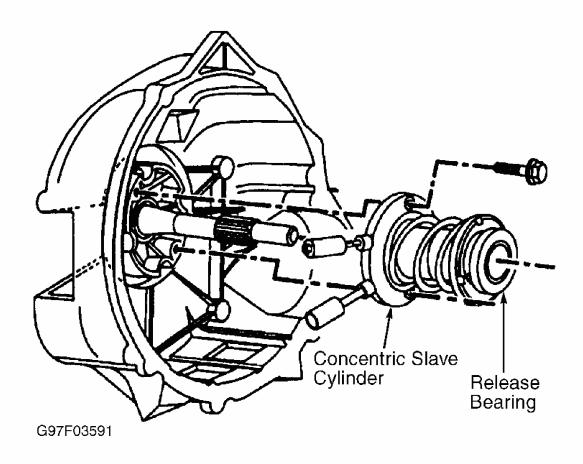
Identifying Concentric Clutch Slave Cylinder Courtesy of GENERAL MOTORS CORP.
